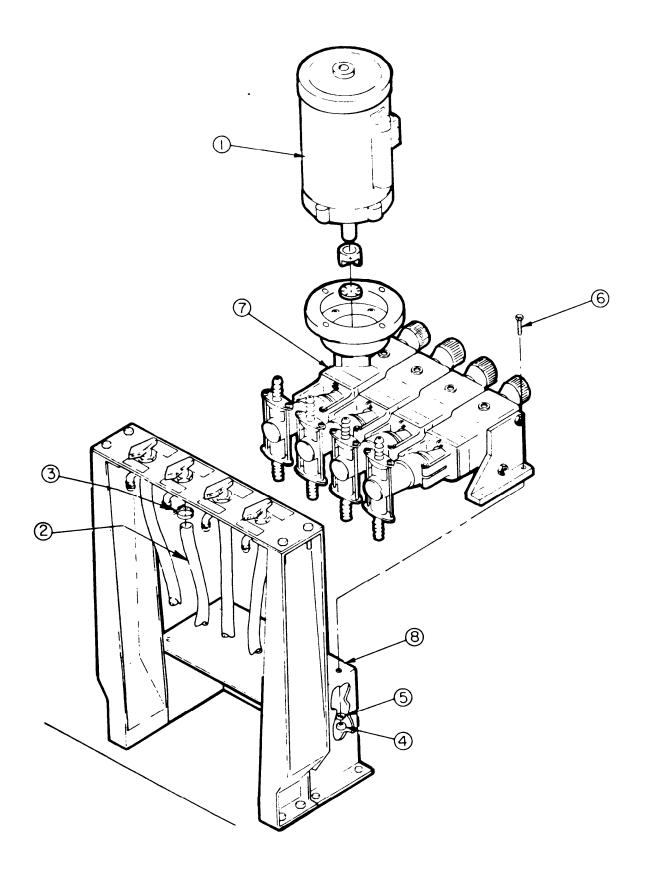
Chemical Feed Pump Assembly (ARMY)
